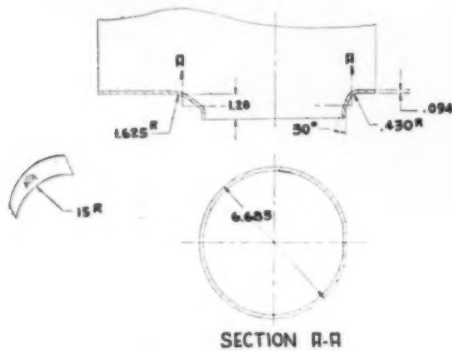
Cross section of flange on the jet-engine part shown in Fig. 2.
